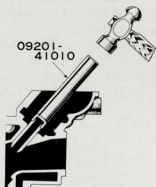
Valve Stem Guide G0313 Bushing Installation
